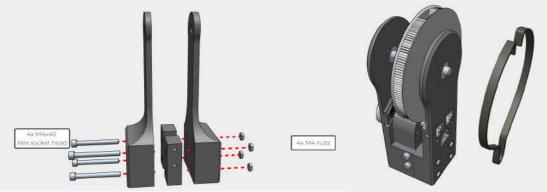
Disassembly instruction of the robotic arm, available at [17]
